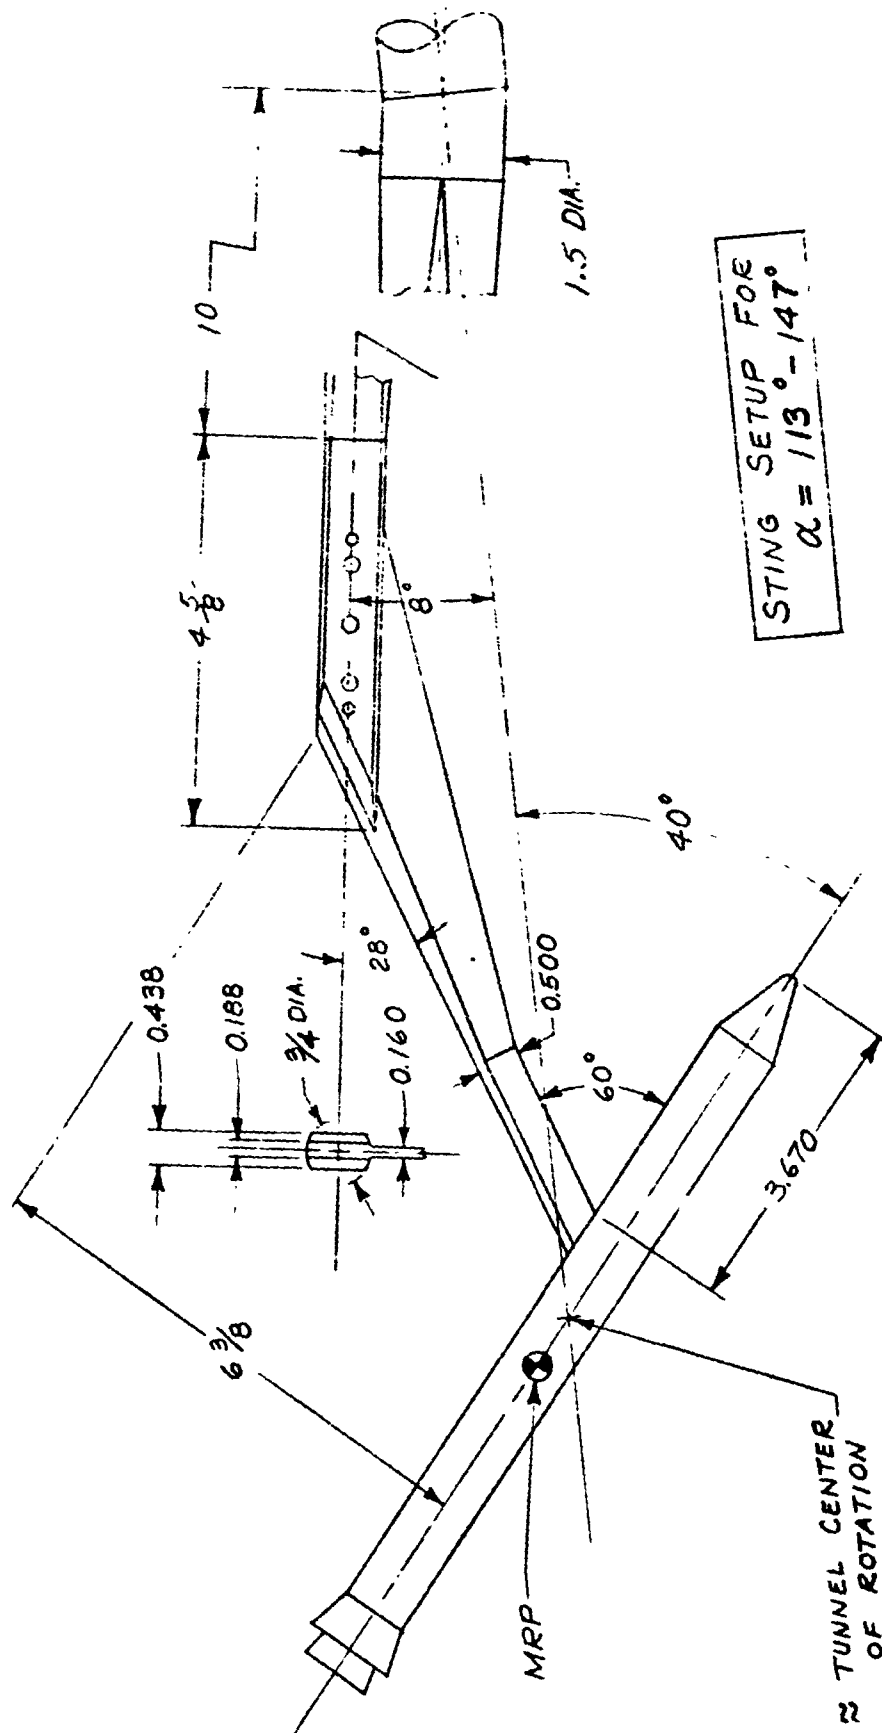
Details of One Piece Side Mounted Sting, No. 131.
